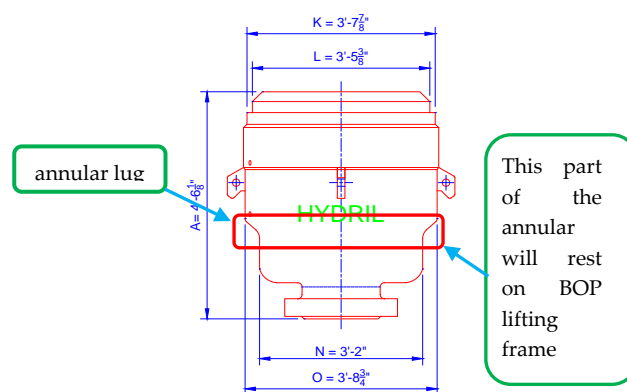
PARTICULARS OF HYDRILL GK 13 5/8" - 5000 ANNULAR BOP
